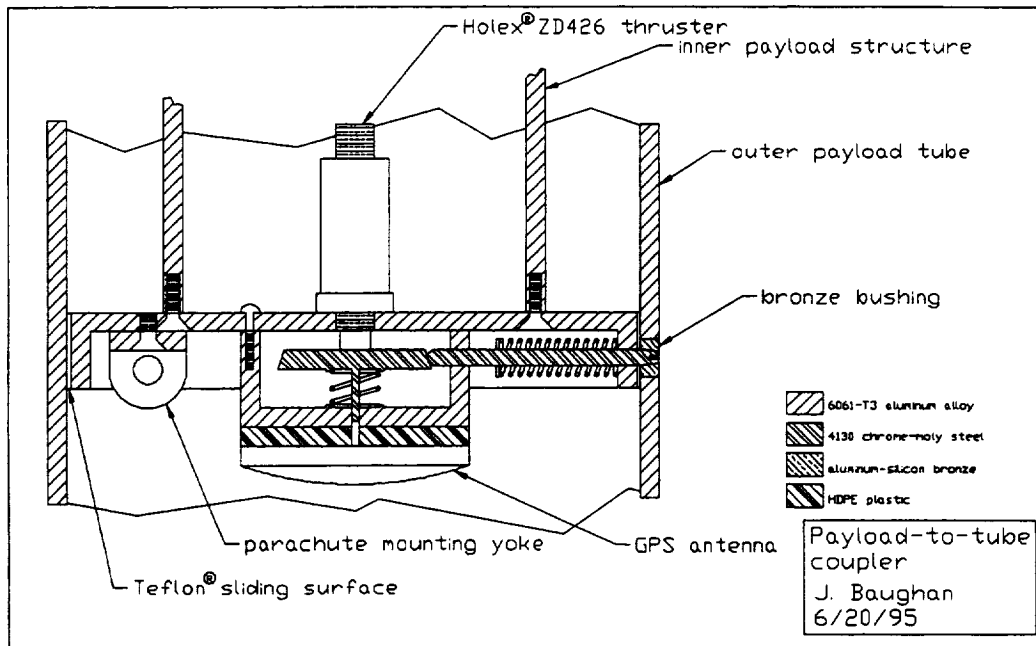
Cutaway Detail of Core-to-Skin Coupler
